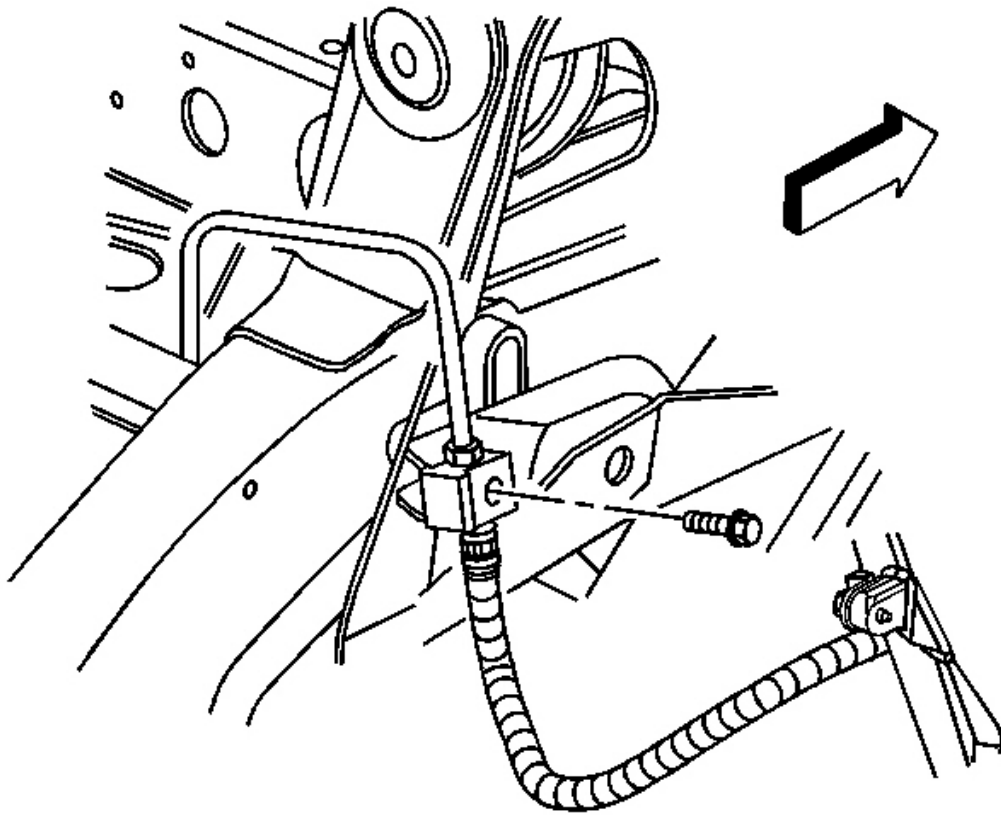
Identifying Front Brake Hose Retaining Bolt
